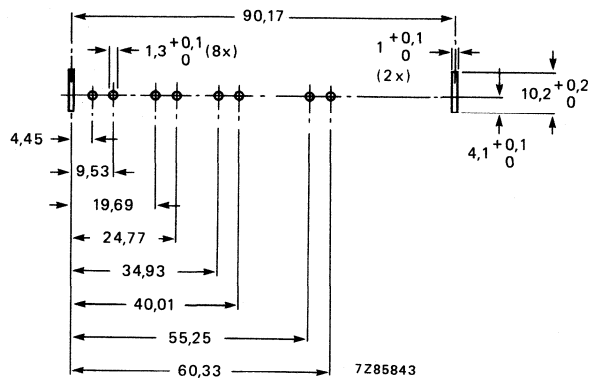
Piercing diagram viewed from solder side of board. Unless otherwise stated the tolerance is $\pm 0,05 \text{ mm}$.
